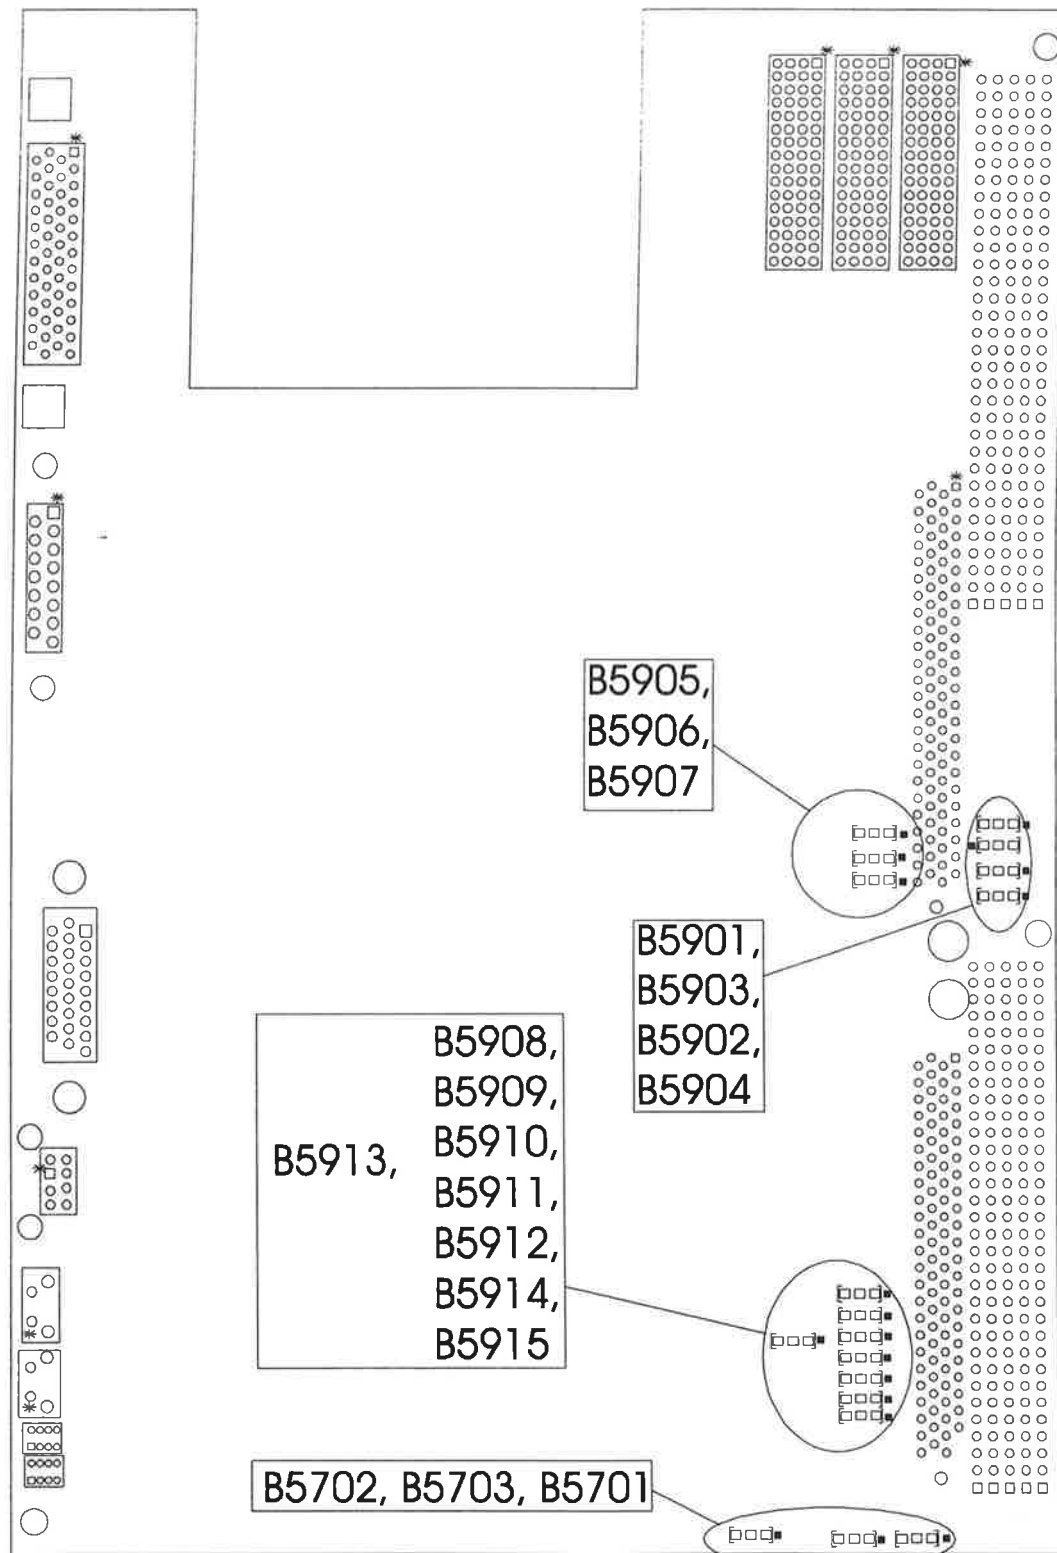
Solder Side: I/O Board Solder Bead Locations
